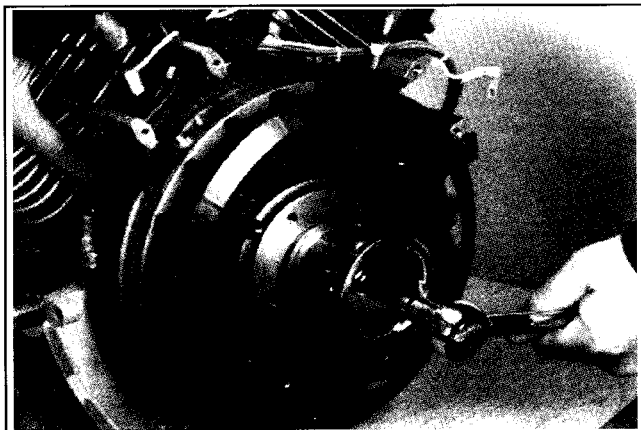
Remove Cup From Retractable Starter Equipped Models.
